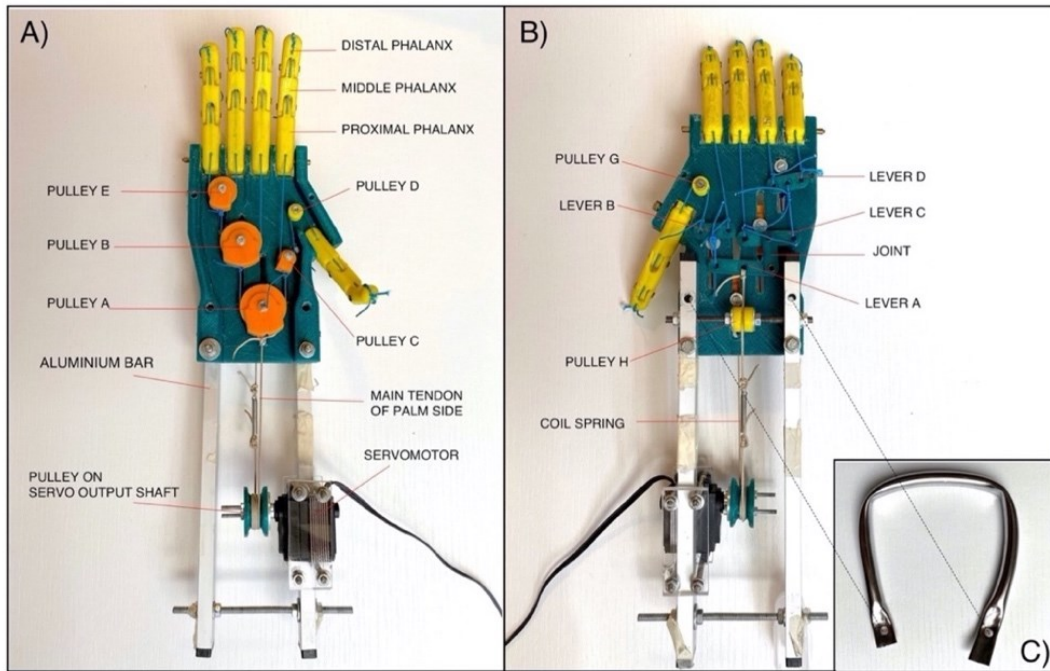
Current version of “Federica” hand: A) Palm view; B) Back view; C) Handle. Two aluminium bars were mounted in back side to remotely fix the servomotor.
